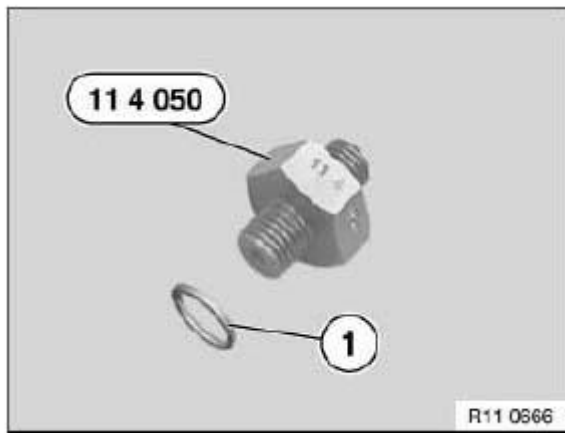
Identifying Special Tool 11 4 050 And Sealing Ring
